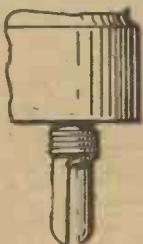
A piece of wire fixed in the cleft of a valve pin will ensure a good contact with the socket.
